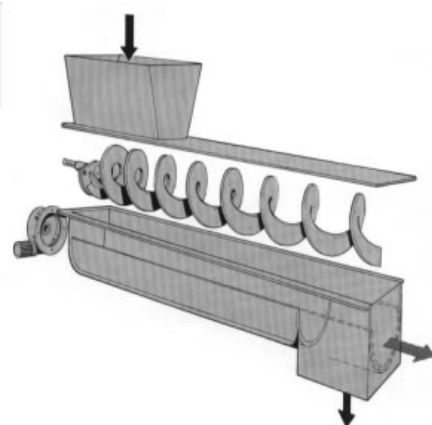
Screw conveyor (shaftless) construction (Spirac, 2009)
